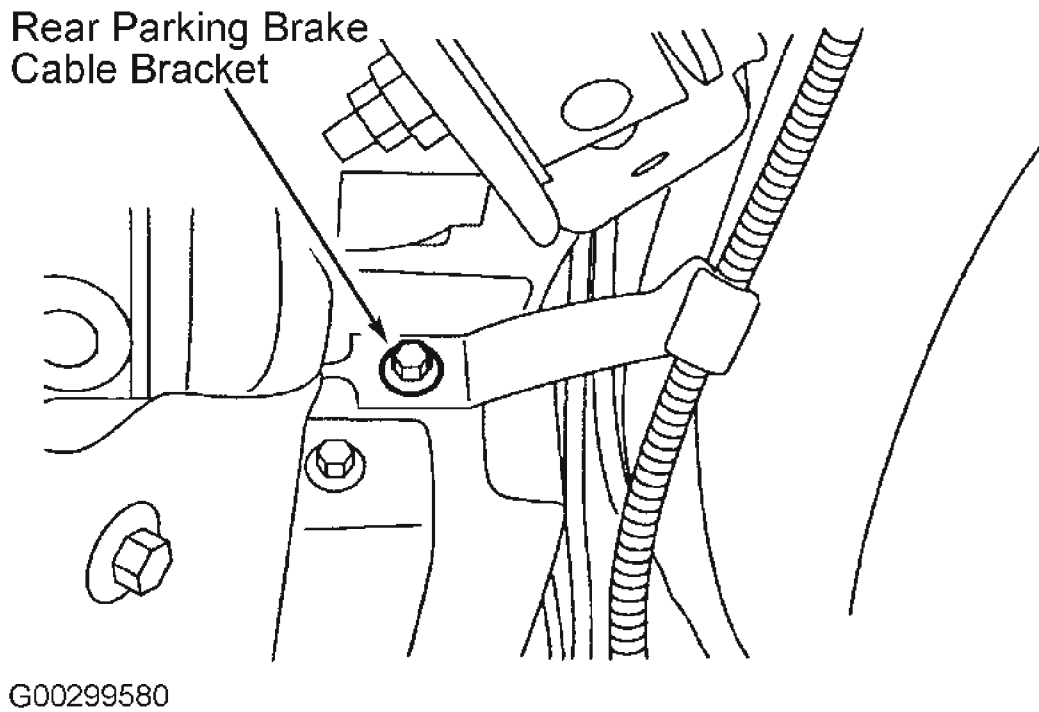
Identifying ABS Cable Bracket Bolt
